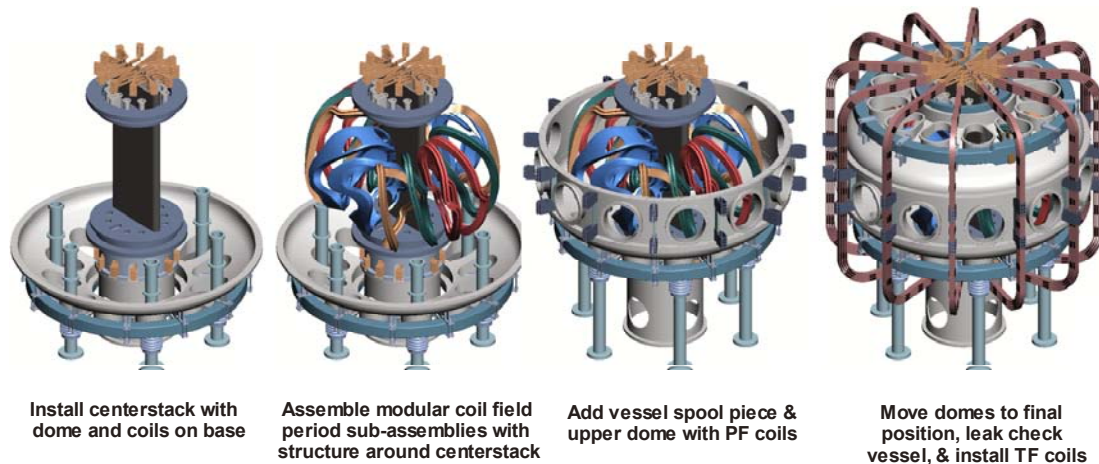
QPS assembly sequence, showing assembly inside external vacuum tank.
